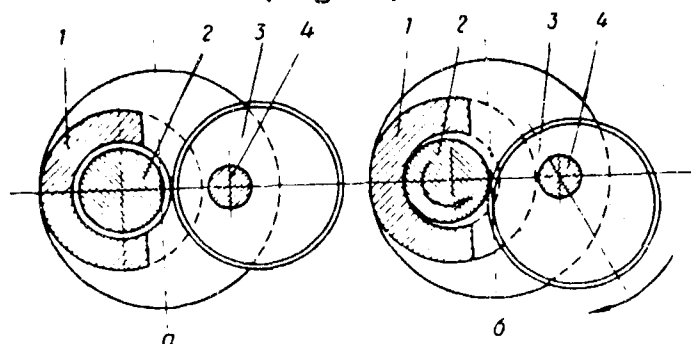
Operating System of Cam Wrench: a - position of cam during placement of wrench on pin; b - position of cam during removal of pin; 1 - wrench frame; 2 - pin; 3 - cam; 4 - cam axis; the arrows show the direction of pin's turning and of wrench frame and cam during removal of the pins.
